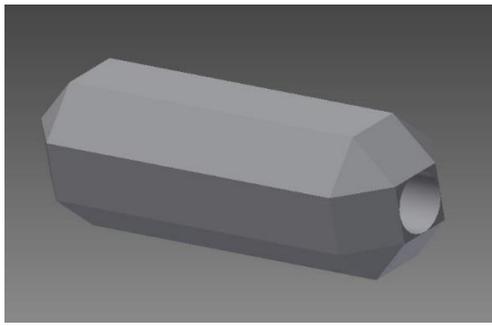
EXTRUDED, CHAMFER, HOLE COMMANDS USED
